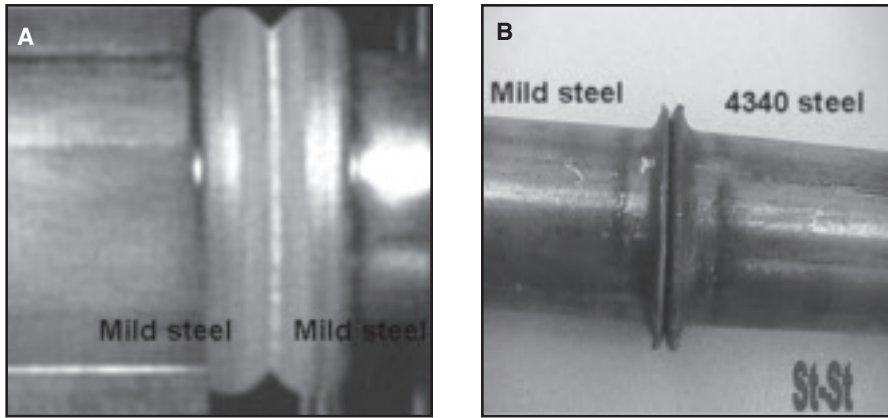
The final shape of the following friction welds: A — Mild steel to mild steel; B — 4340 steel to mild steel.
